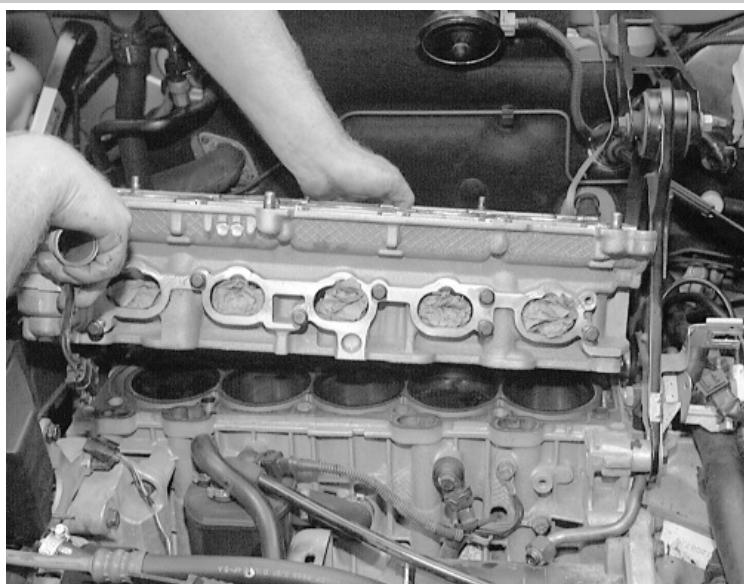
Carefully lift the cylinder head off of the engine block
